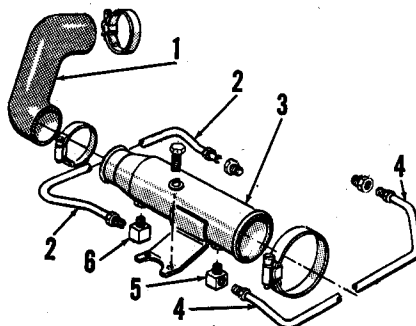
Engine oil cooler (3) is mounted on steering motor and is connected by lower radiator hose (1) to cooling system. Hose connecting cooler to radiator is not shown. Note that outlet fitting (6) contains a relief valve to maintain engine oil pressure on 8000 and 8600 models only.
